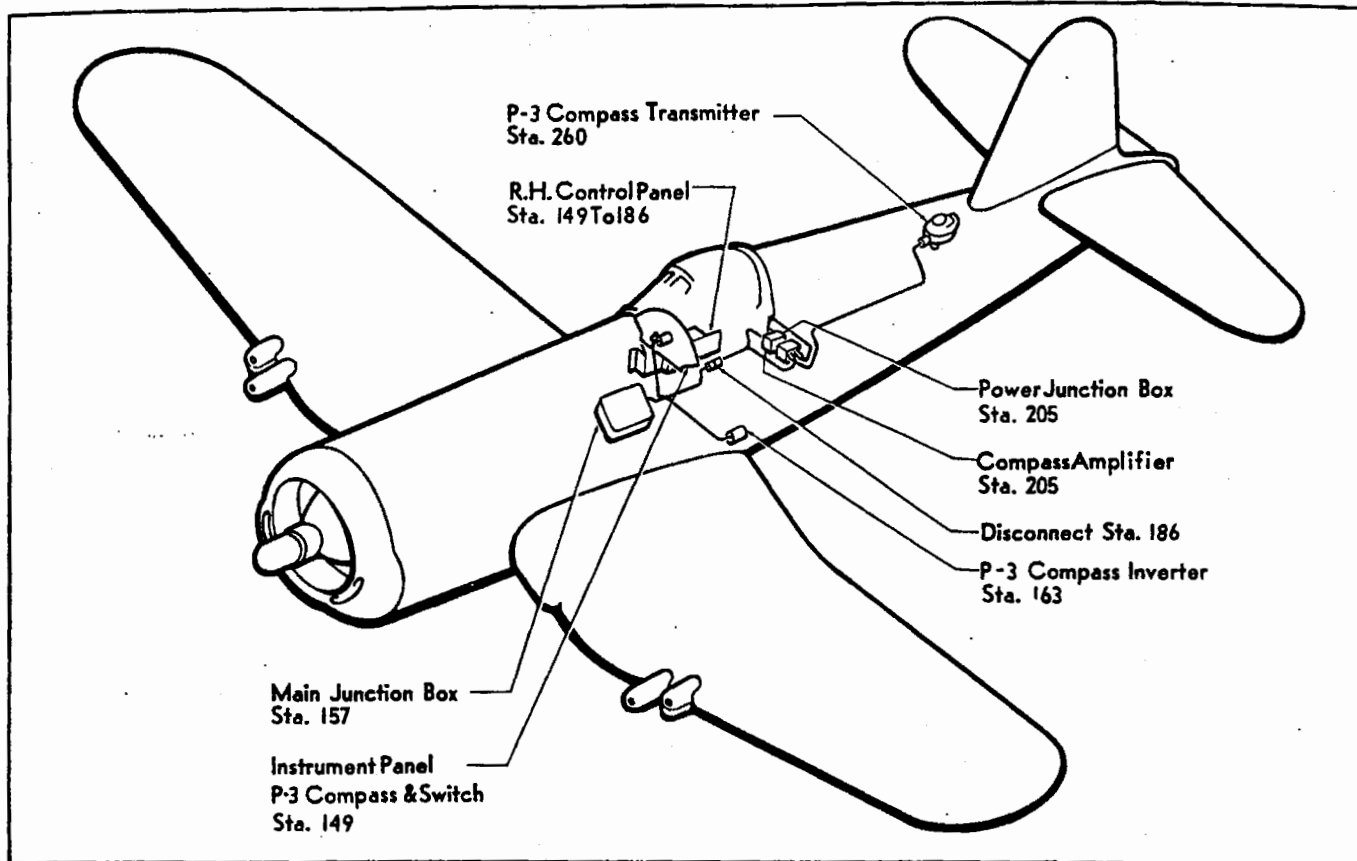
(Sheet 2 of 2 Sheets). Flight Indicator Circuits—P-3 Compass.
